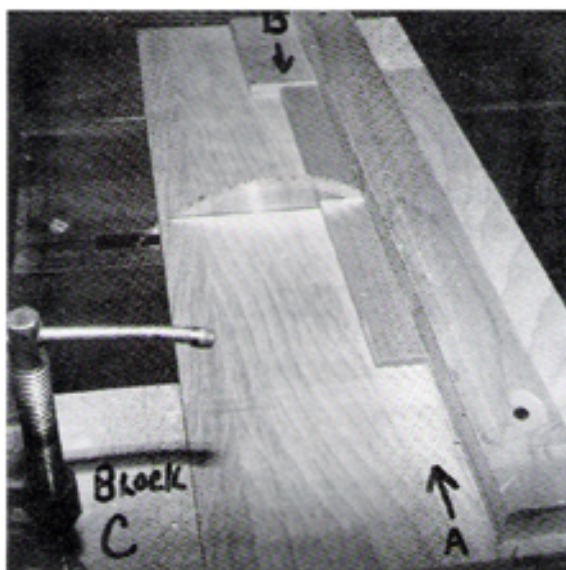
Cross-cut your blank. Move your jig out of the blade, then slide the wood strip to point "A". Then cut the next part.
